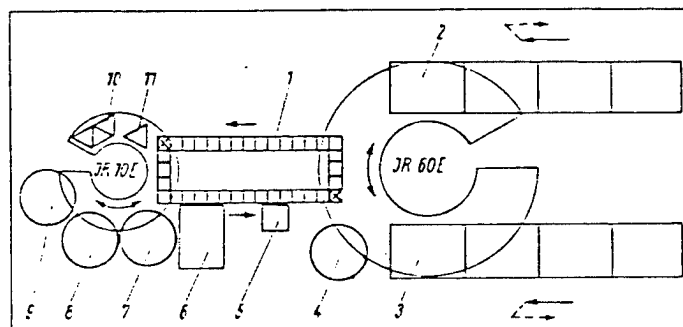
Lay-Out of the Assembly Line for the Automated Assembly of the Crankshaft and Connecting Rod/Piston Subassemblies.
